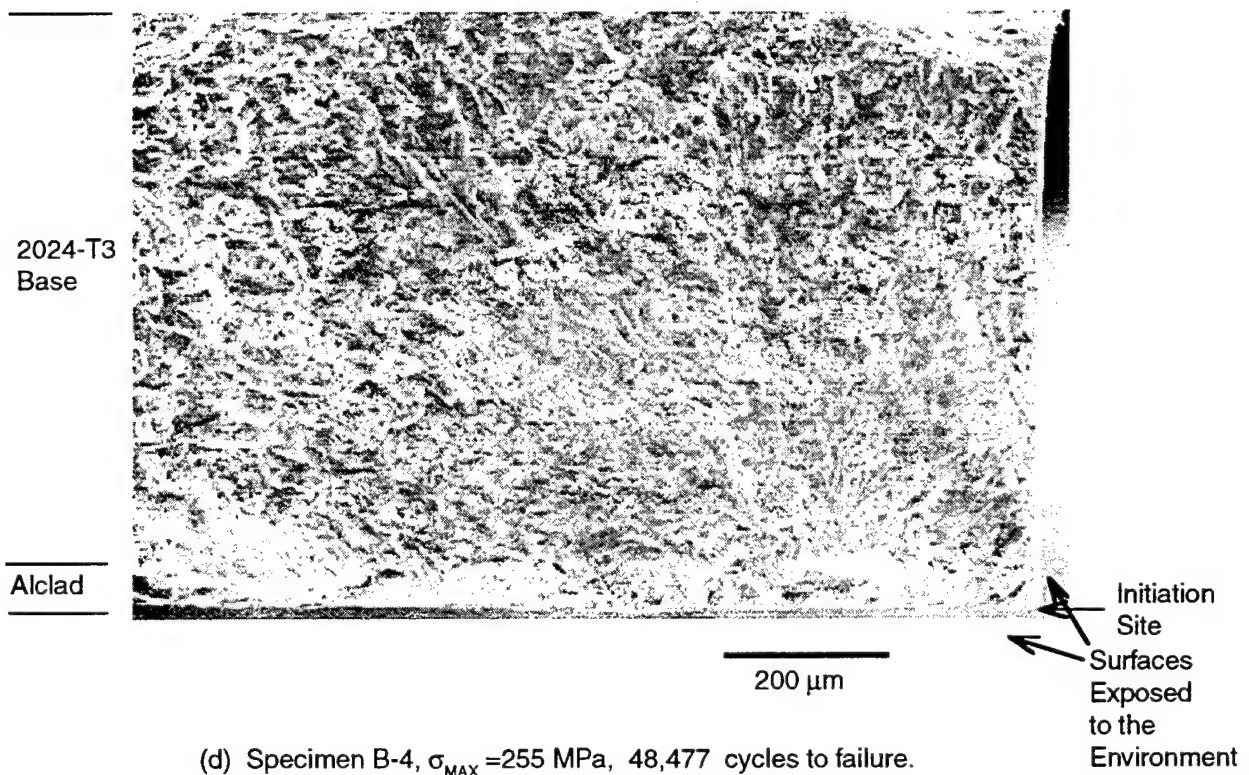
FRACTURE SURFACE APPEARANCE OF ALCLAD 2024-T3 FATIGUE SPECIMENS TESTED IN 0.5 M NaCl SOLUTION.
